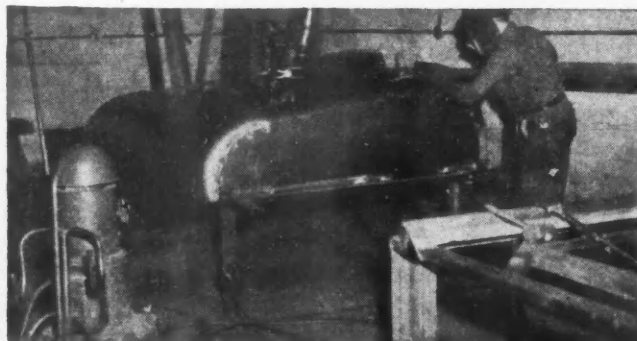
Advertising compartment for beverage body. Formed sheets are assembled and tack-welded on the table-type jig, then continuous welded with "Fleetweld 37."
